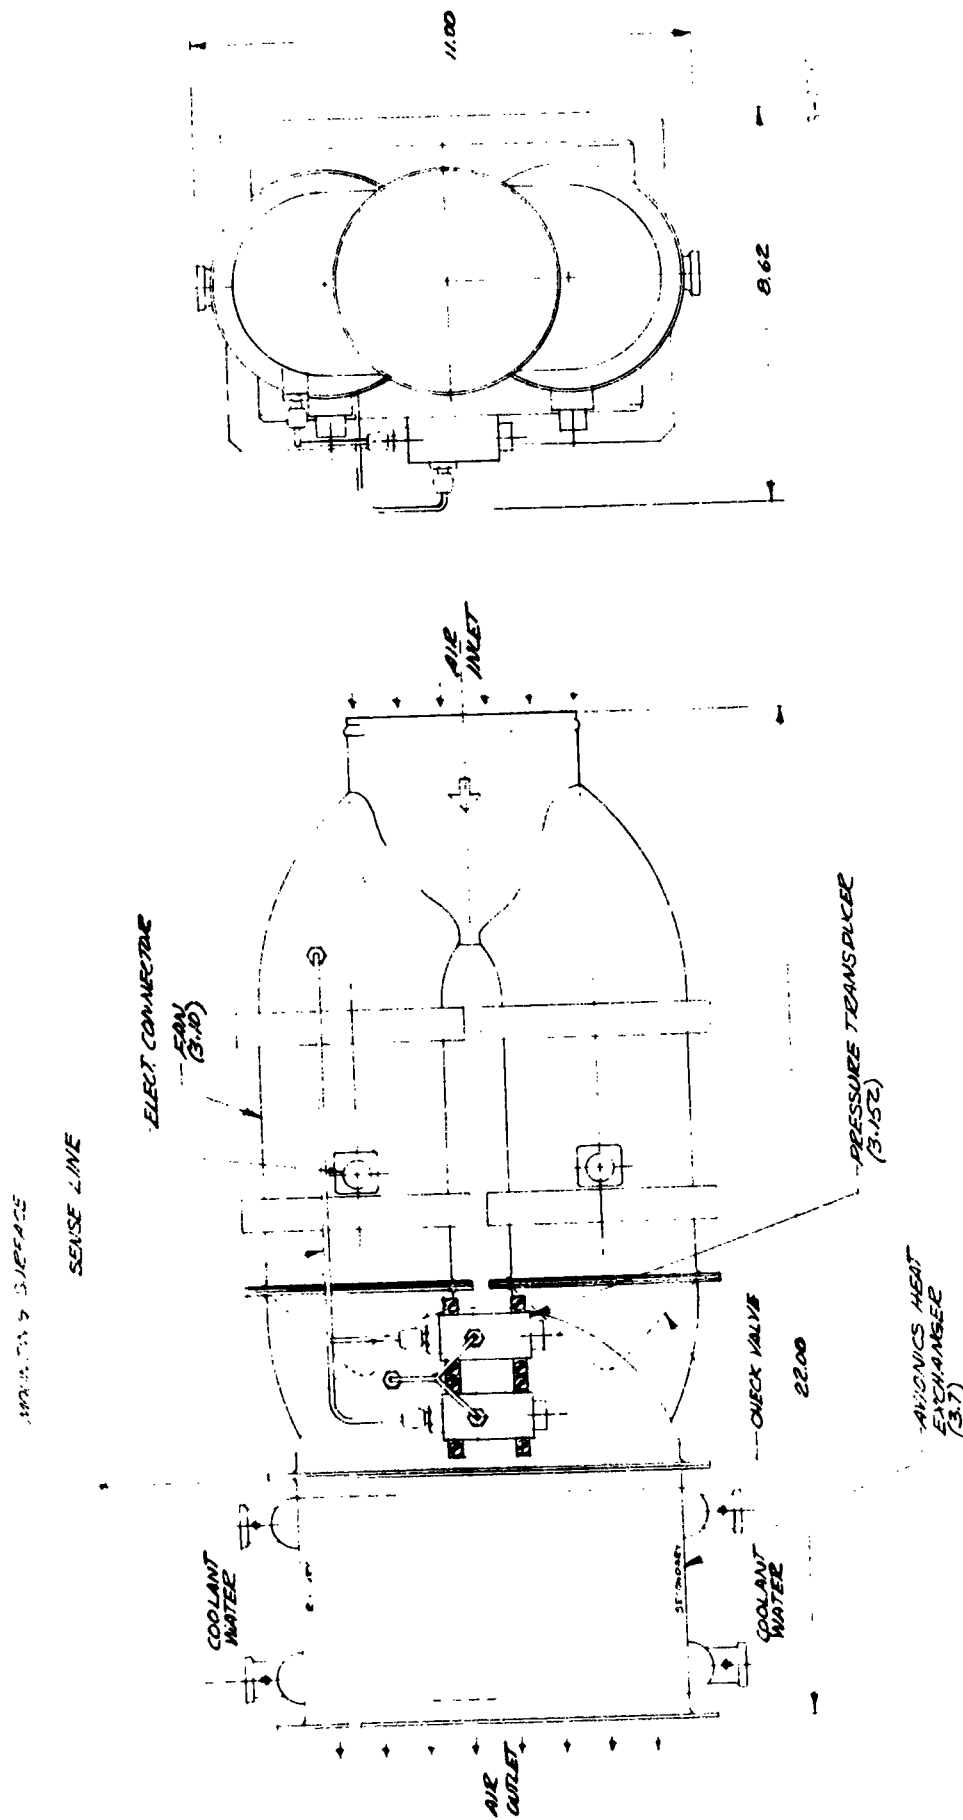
Air-Cooled Avionics Package Assembly, LRU 3-B
